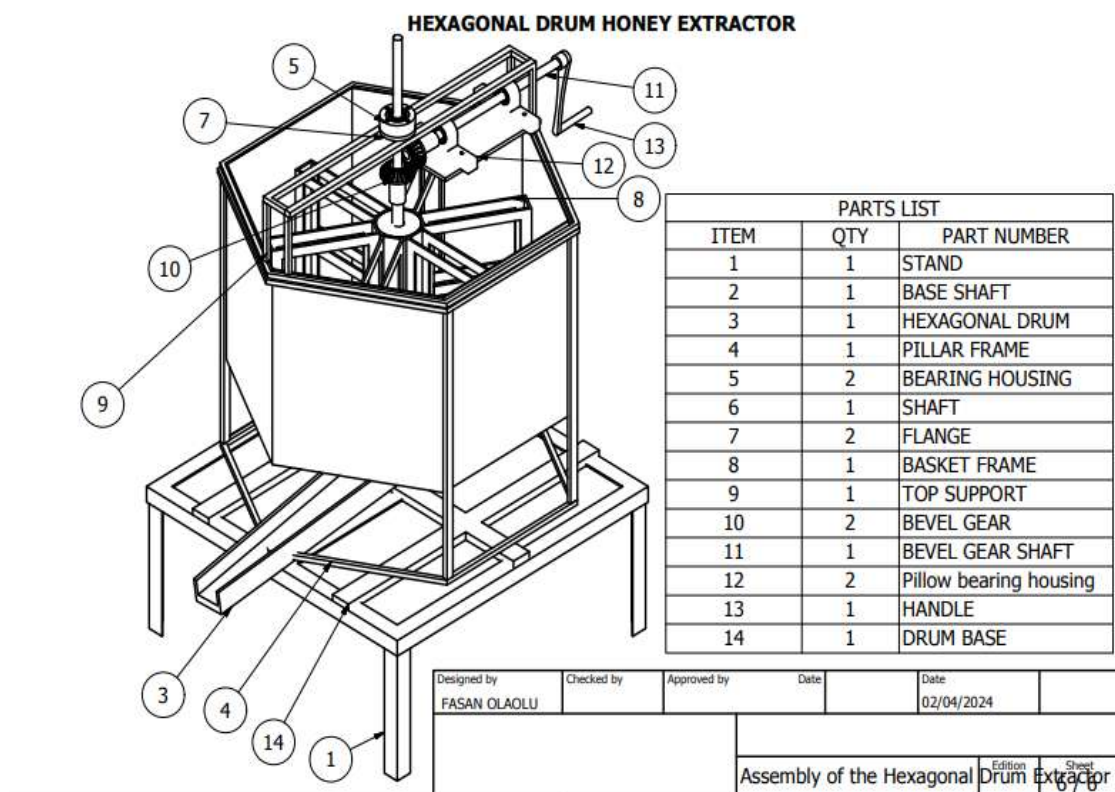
Isometric view of Hexagonal Drum Honey Extractor
